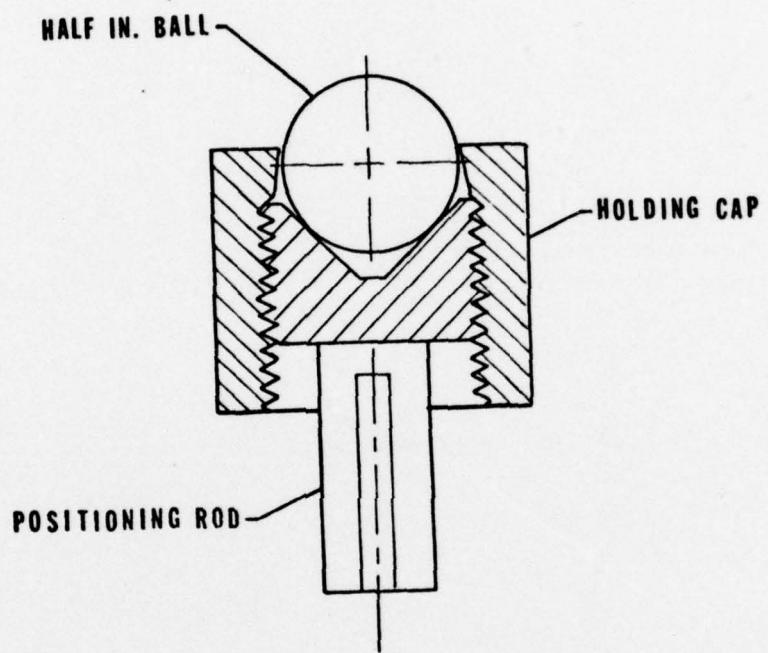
Cross sectional view of bearing ball holding and positioning fixture. Scale 2:1.
